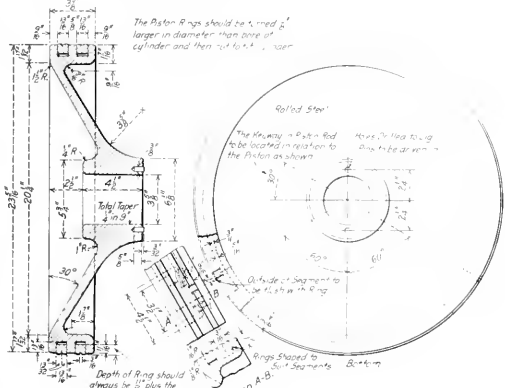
Piston of Pennsylvania Atlantic Type Locomotive
